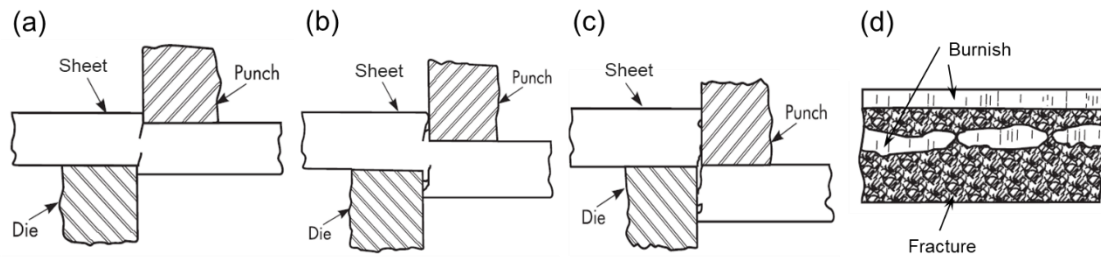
Shearing with insufficient clearance: (a) fracture initiation, (b) multiple fracture paths, (c) complete separation, and (d) sheared surface with a double-burnish area [28].
